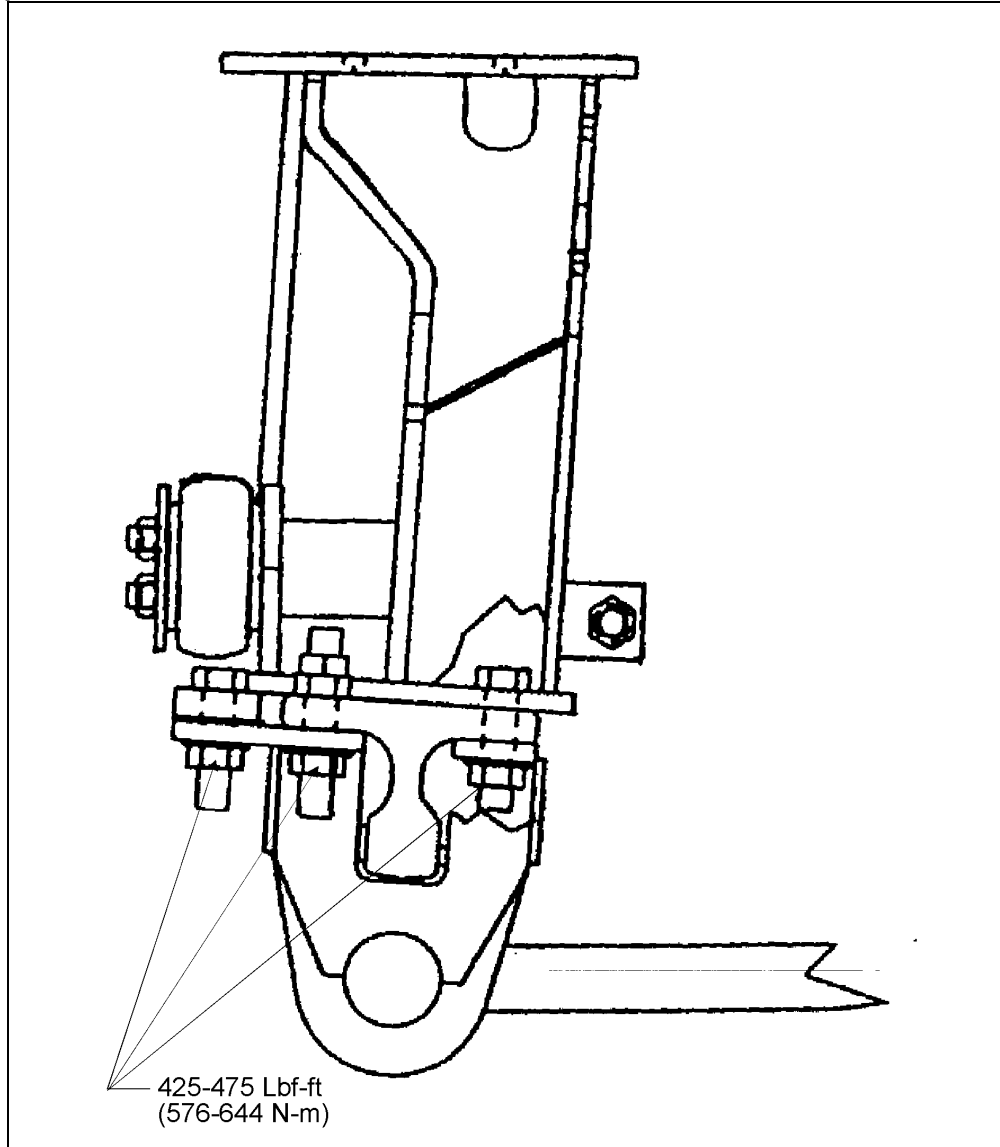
AIR BELLOWS MOUNTING SUPPORT AND AXLE
